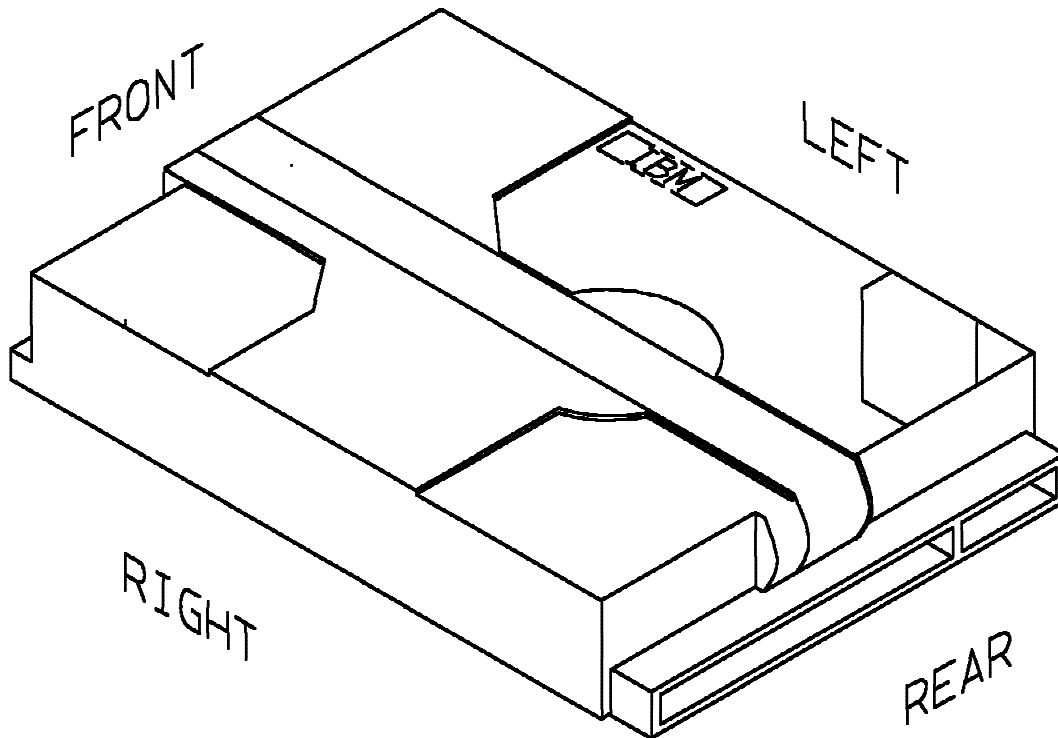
Ultrastar 2XP Disk Drive Assembly
